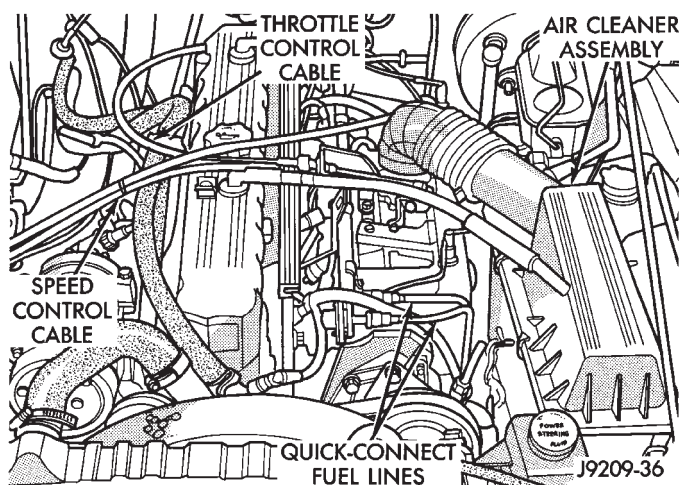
Fuel Line Quick-Connect Couplings, Air Cleaner Assembly, Throttle & Speed Control Cables
